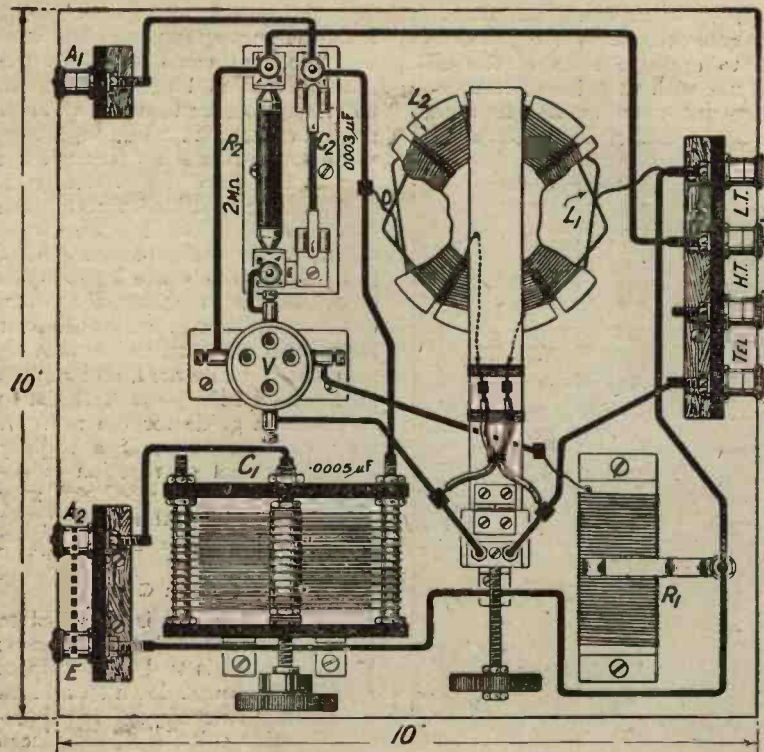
When all parts have been mounted in position, wiring is carried out as shown.
